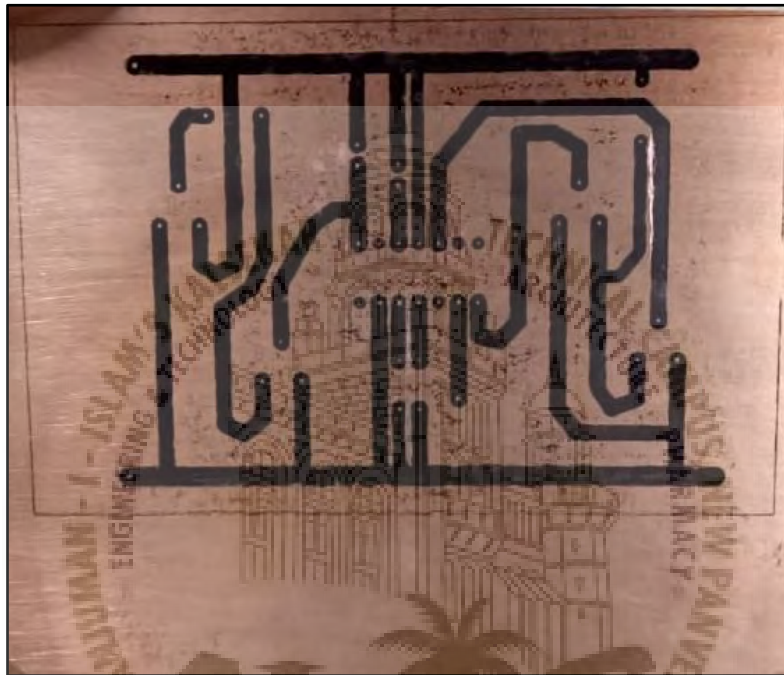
PCB laser Marking of IC 8038 Tone generator
